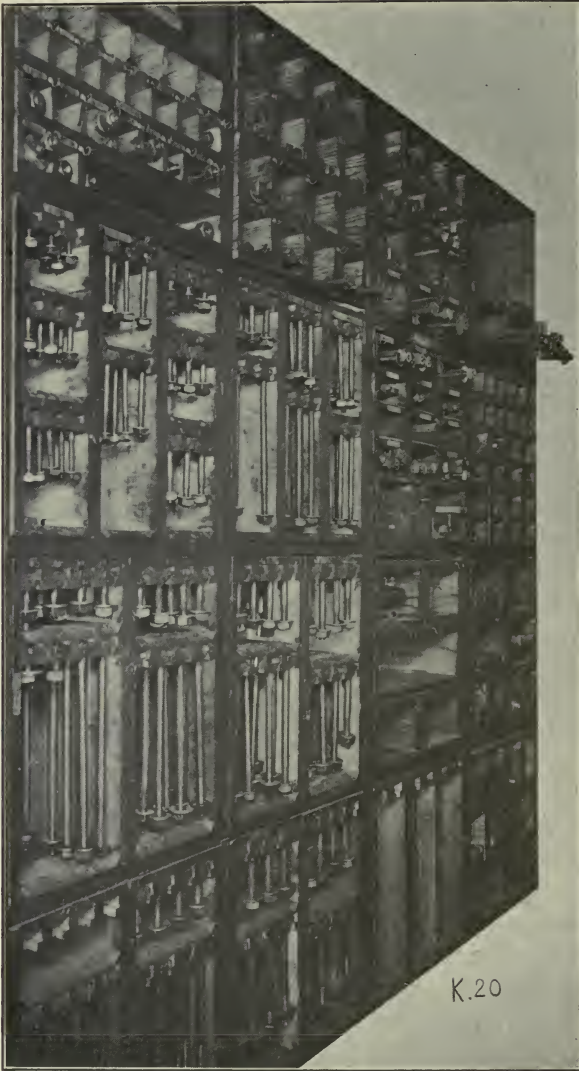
Tool-room section made up of tiers of racks, and each compartment subdivided with boxes labeled with brass plates, giving the size and symbol of the bolts contained therein. Particular attention is called to the method of stocking the bolts; the sizes and lengths of the bolts regulate the sizes of the boxes. Pegs are provided on the front of the bottom beveled edge for the workman's checks.
